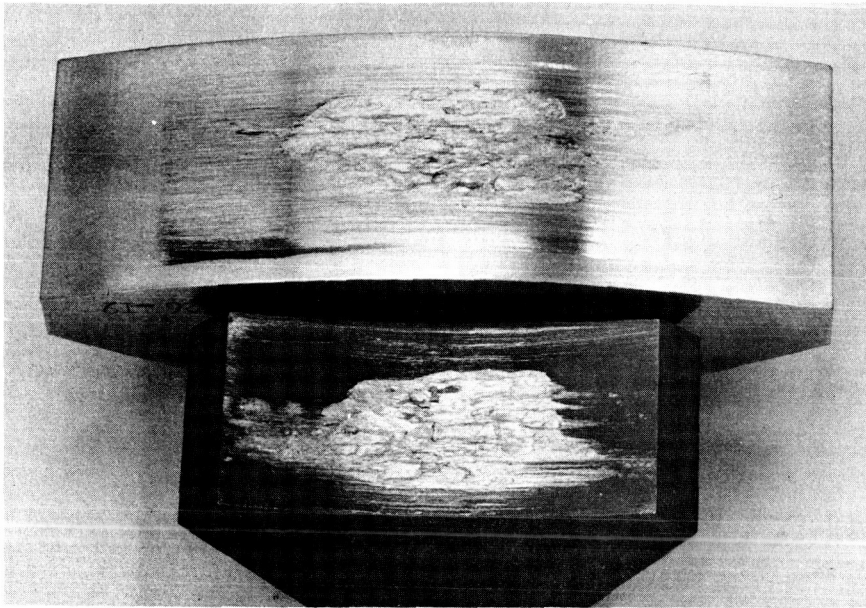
BALL JOINT TEST SPECIMEN TYPE - 19;
